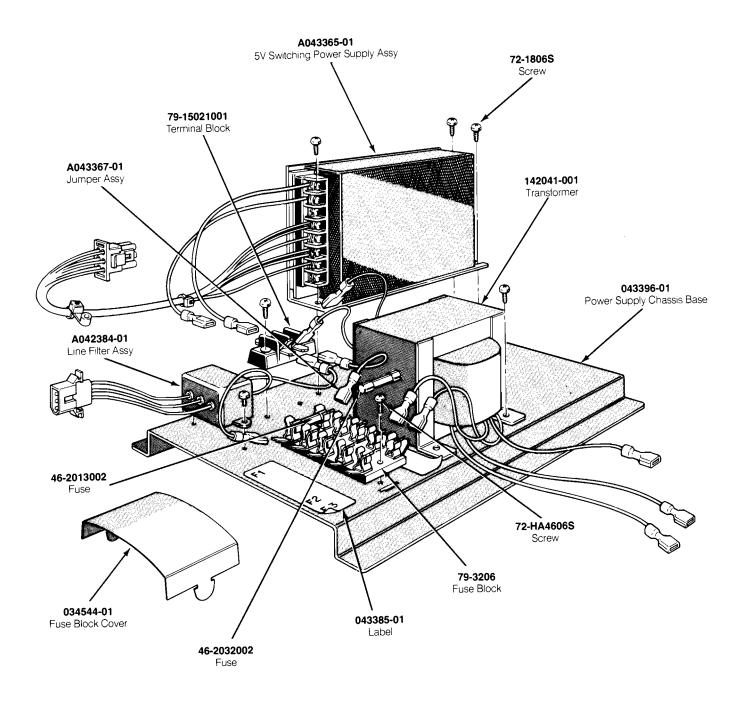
Switching/Linear (SL) Power Supply Assembly A043363-01 A
